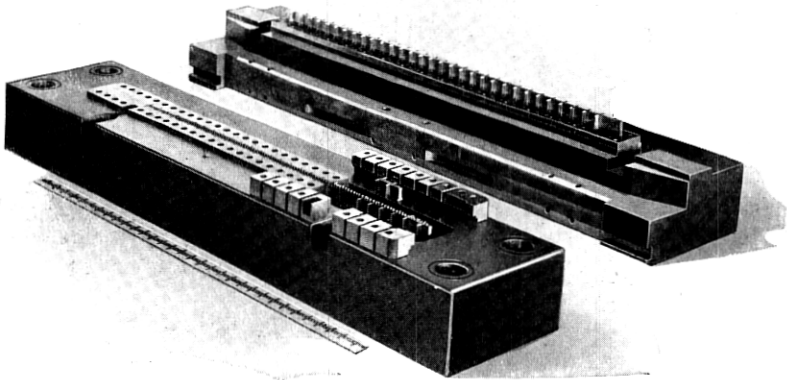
Compound punch and die for blanking and perforating multiple bank terminal strip.
